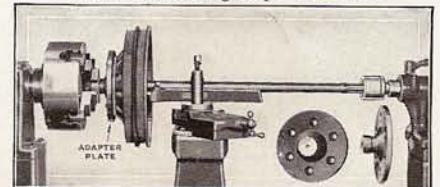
Truing Brake Drum with Hub and Axle Integral. This Type Used on Rear Wheels of Chevrolet, Pontiac and Buick.
